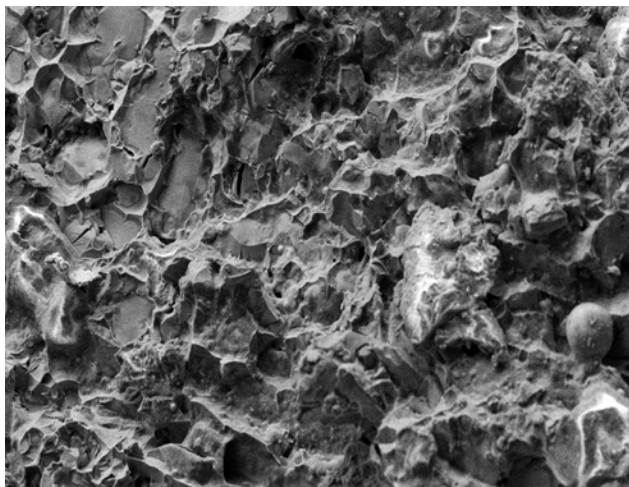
Fracture surface image of superior strained specimen.
